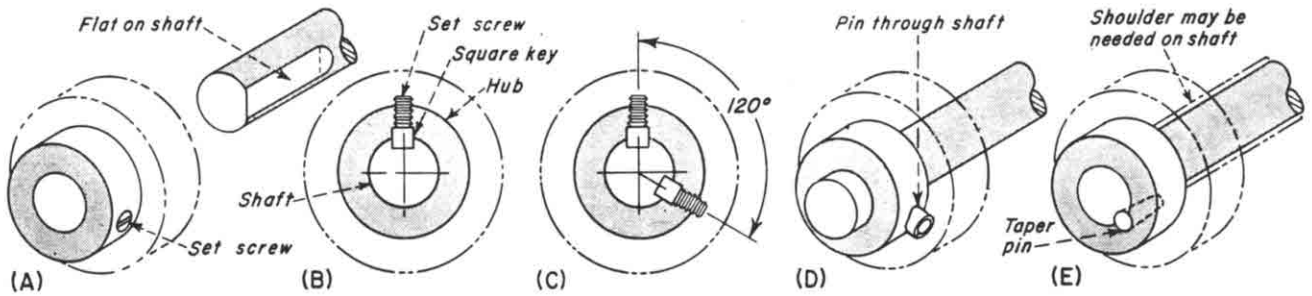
A cup-point setscrew in hub (A) bears against a flat on a shaft. This fastening is suitable for fractional horsepower drives with low shock loads but is unsuitable when frequent removal and assembly are necessary. The key with setscrew (B) prevents shaft marring from frequent removal and assembly.
